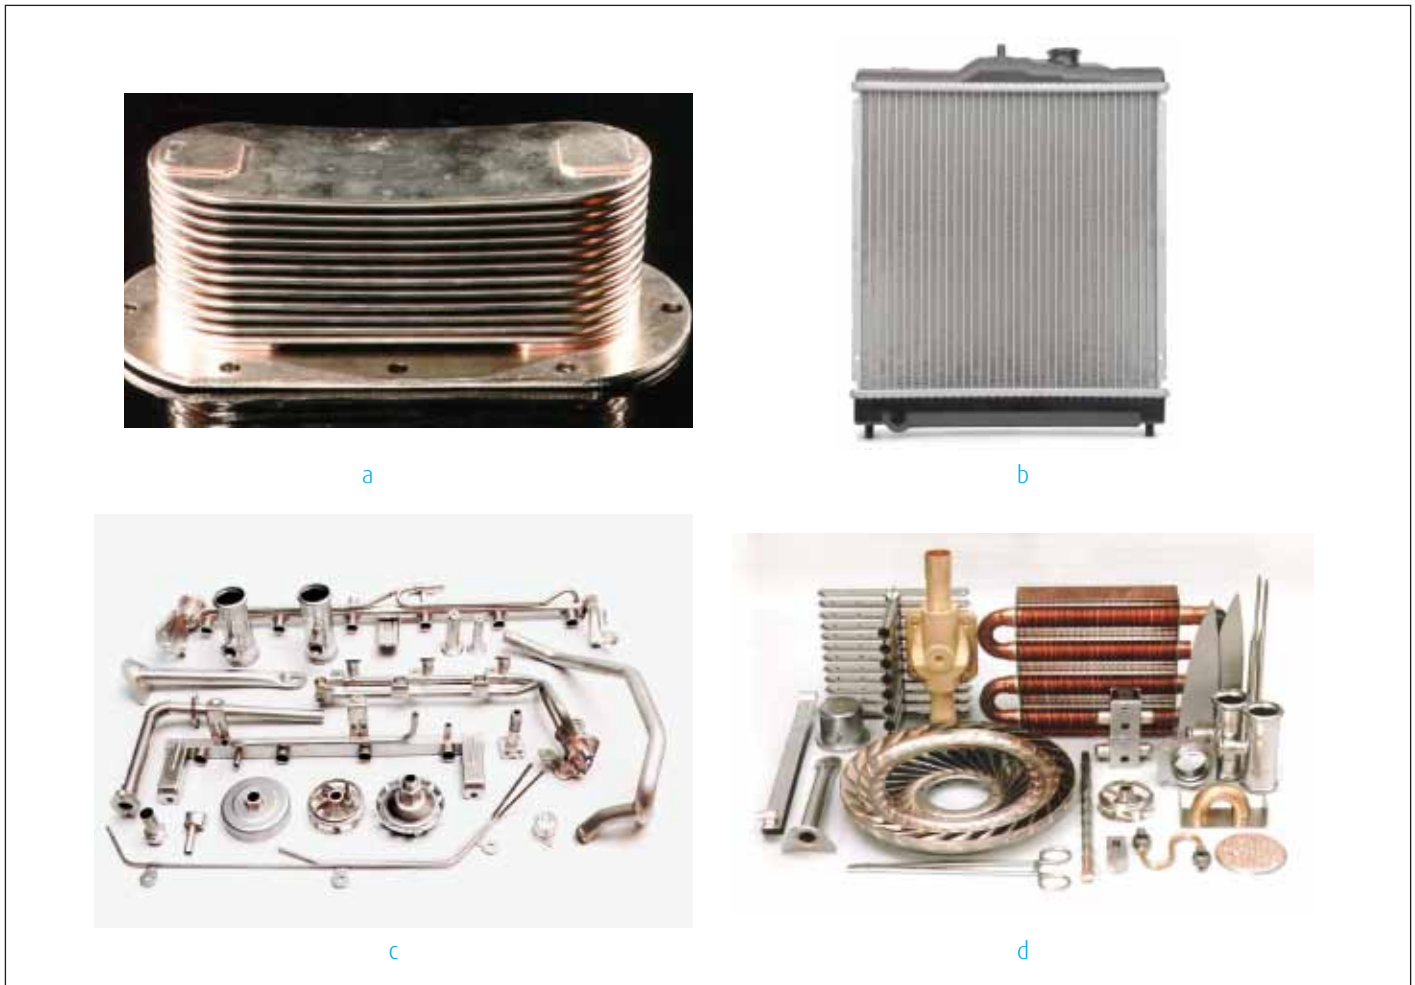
Examples of brazed parts. Heat exchangers: (a) courtesy of Mahler GmbH and (b). Different automotive and other parts courtesy of Mahler GmbH: (c) and (d)
